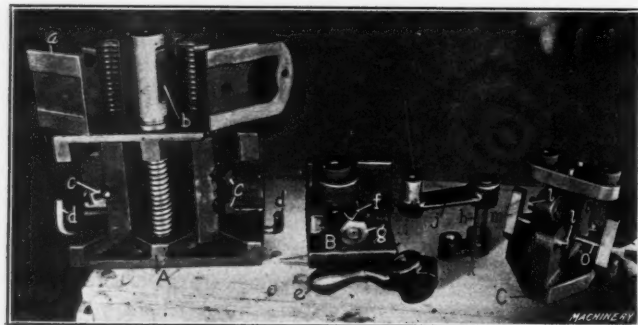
Group of Jigs used for drilling Lathe Apron Parts
